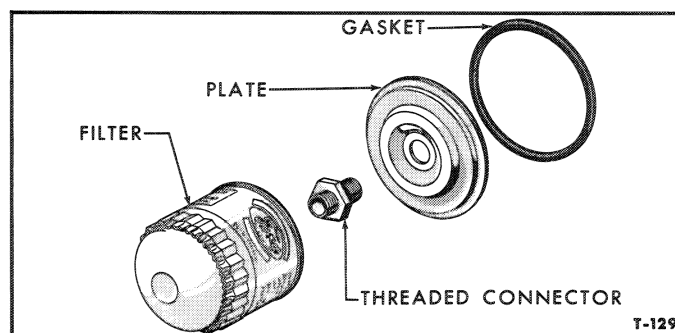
Later Type (Throw-Away) Oil Filter—Disassembled
